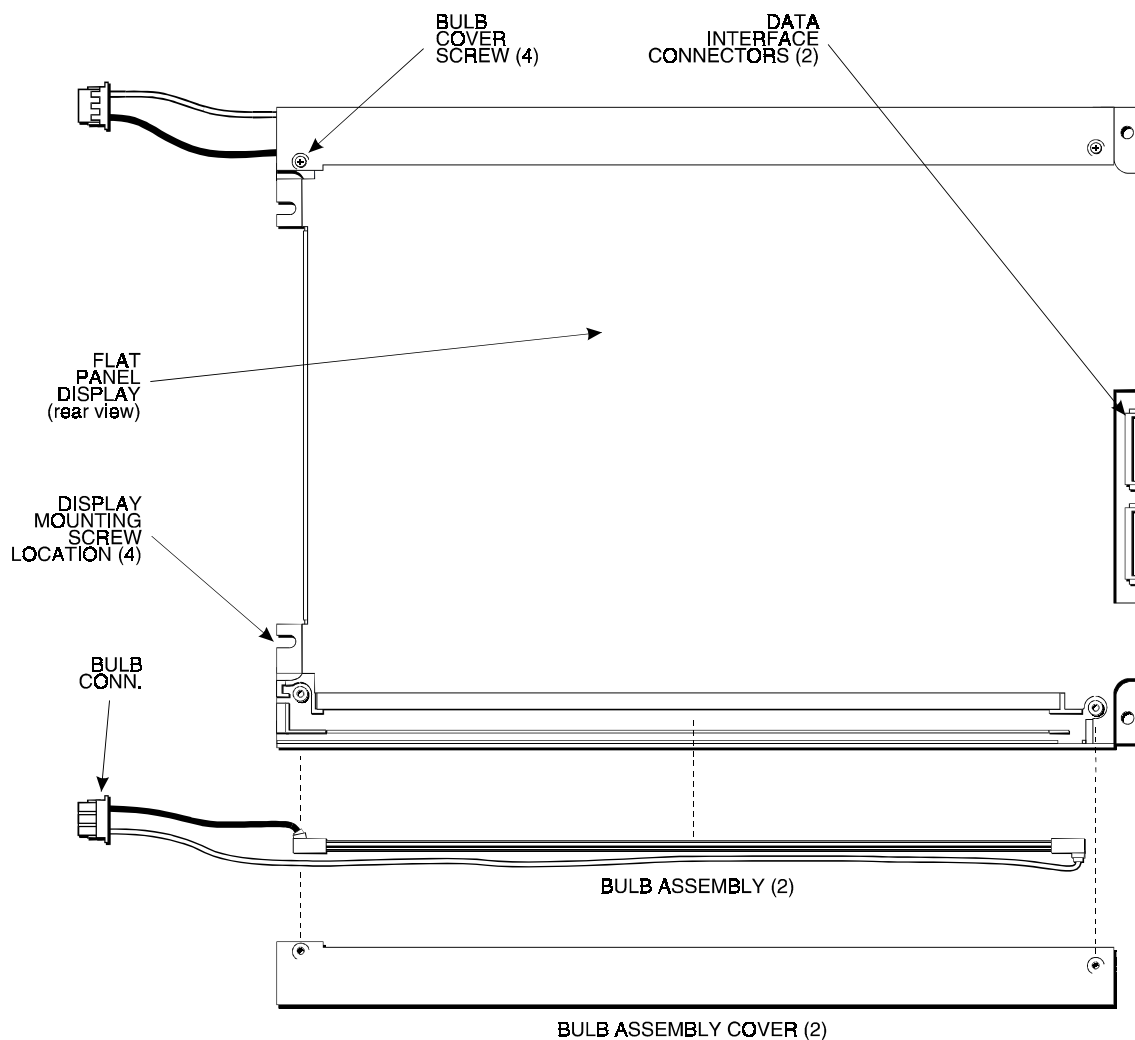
Figure Appendix D -1. Model #KCS6448HSTT-X21 Bulb Assembly
